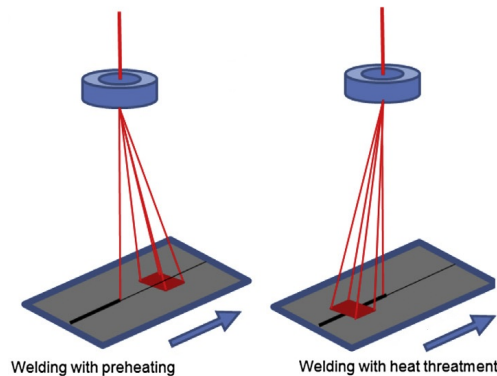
Schematic representation of electron beam welding with preheating (left) and post weld heat treatment (right) [22].
